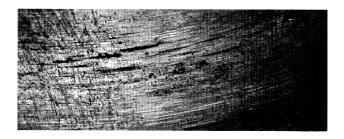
10X magnified view showing appearance of area cracked due to abnormal loading imposed on the propeller flange during periods of unauthorized maneuvers.
